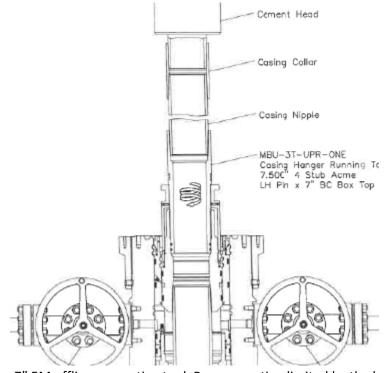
Cactus 7" 5M offline cementing tool. Pressure rating limited by the lesser of 5M tool rating or the 7" pup joint and casing.
